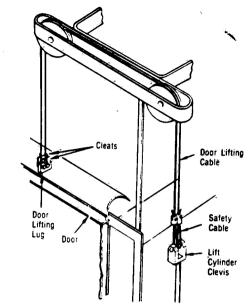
, ROUTING DOOR LIFTING CABLE.
